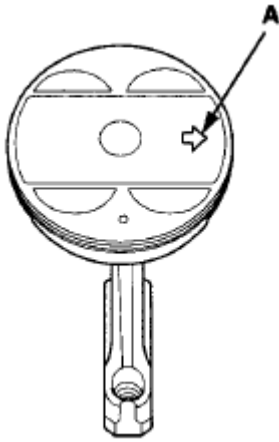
Positioning Piston/Connecting Rod Assembly With Arrow Facing Timing Belt Side Of Engine Block
